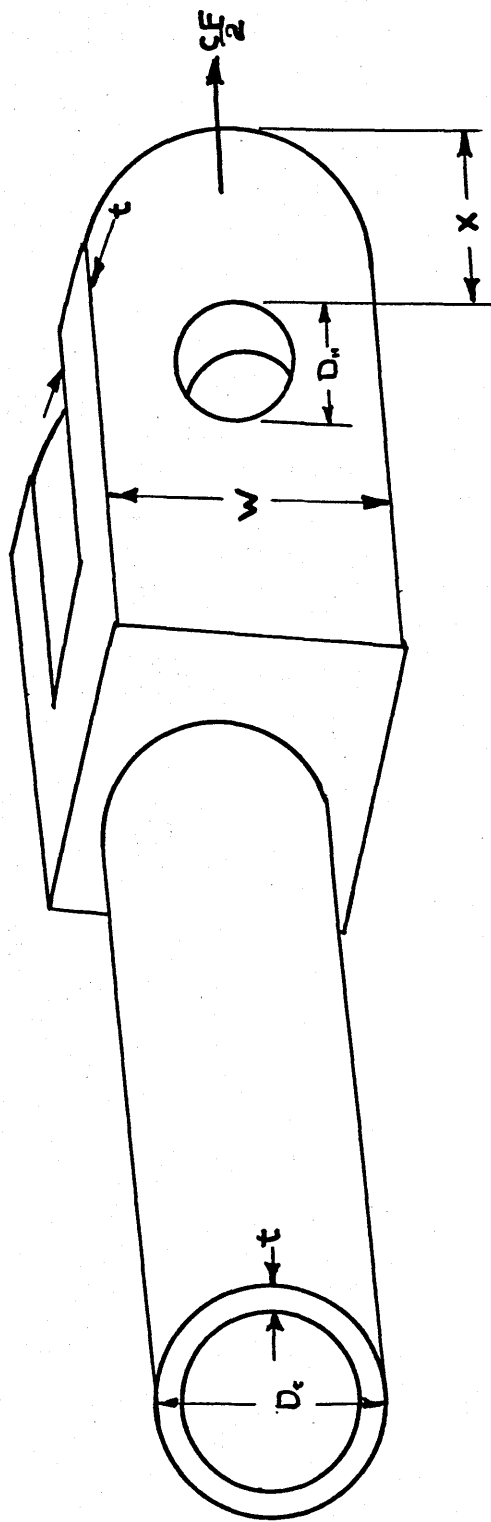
FLAPPING HINGE SHAFT CONNECTION
